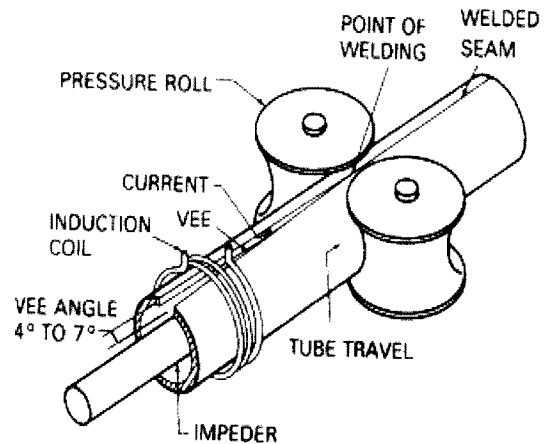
Schematics of high frequency induction welding process used in producing aluminium tube.
